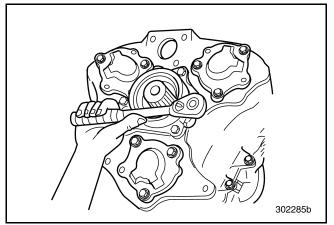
Removing Rear Mainshaft Bearing Cover Capscrews
